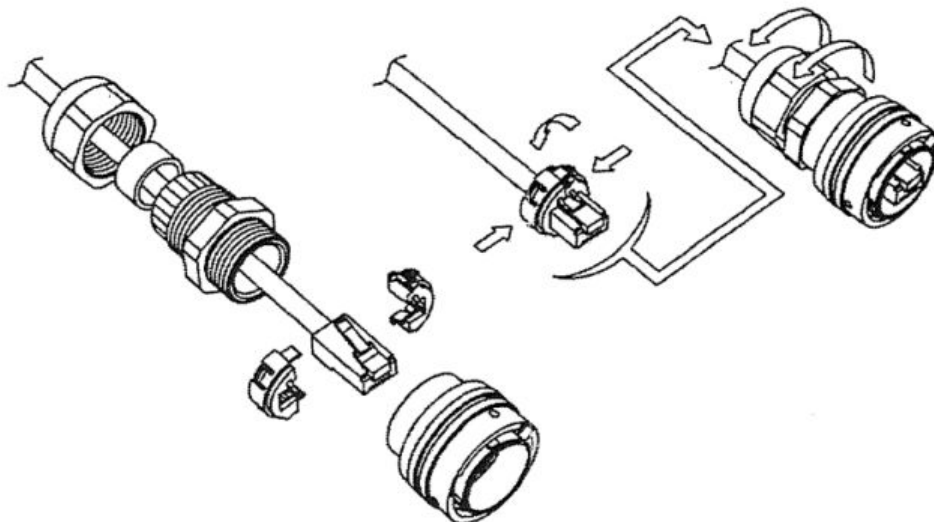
Assembling the RJ-45 connector housing – outside portion
